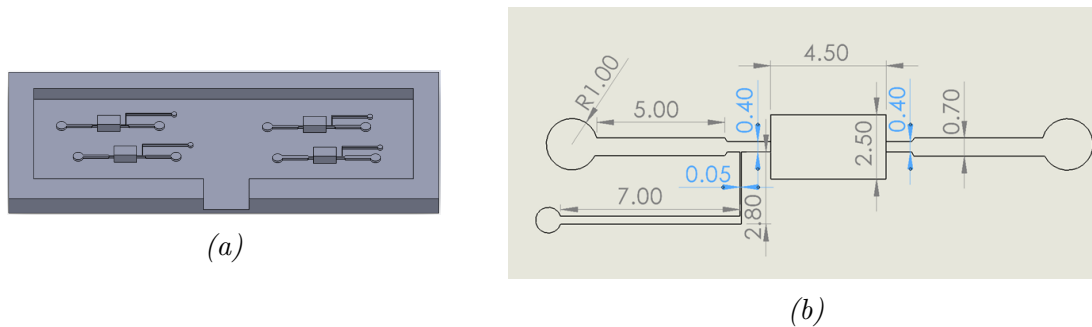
The design of the improved microdispenser in Solidworks (a) and the technical drawing (b).
